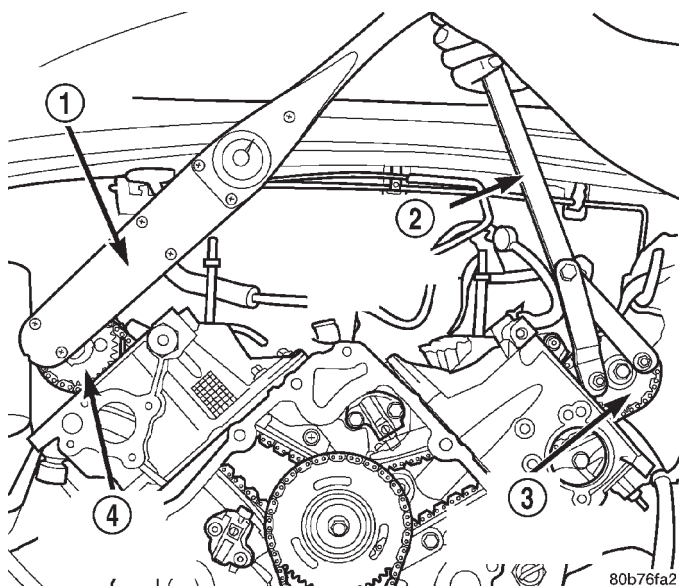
Camshaft Sprocket Installation—Right Cylinder Head
